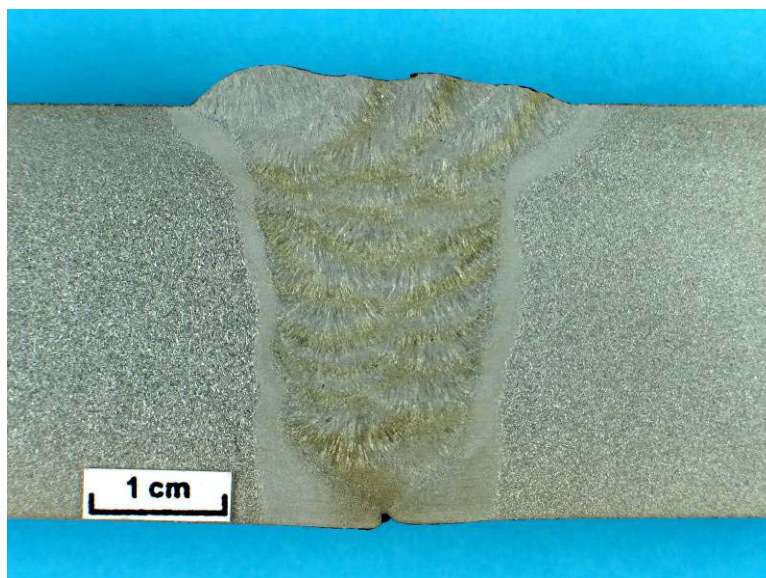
Macrograph of the P23 weldment – filler metal: B323(experimental).
